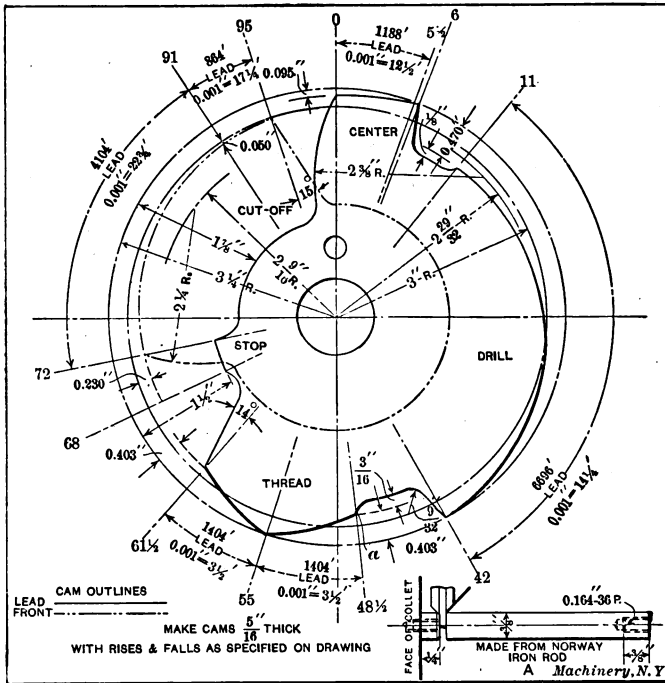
Example of Design of Thread Lobe when using Belt Shifting Attachment
